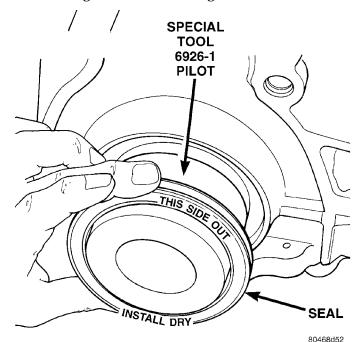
Rear Crankshaft Seal and Special Tool 6926-1
